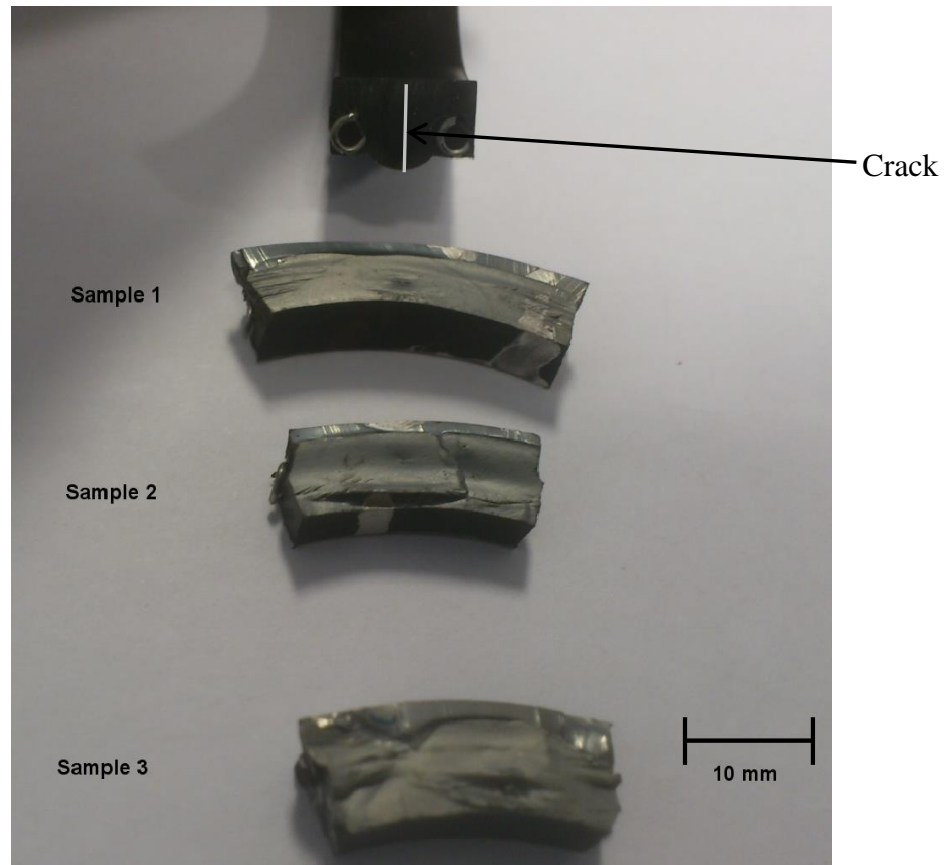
Carbon coated fractured surfaces of spring seals, where the grey colour is carbon coating making the surfaces more conductive.
